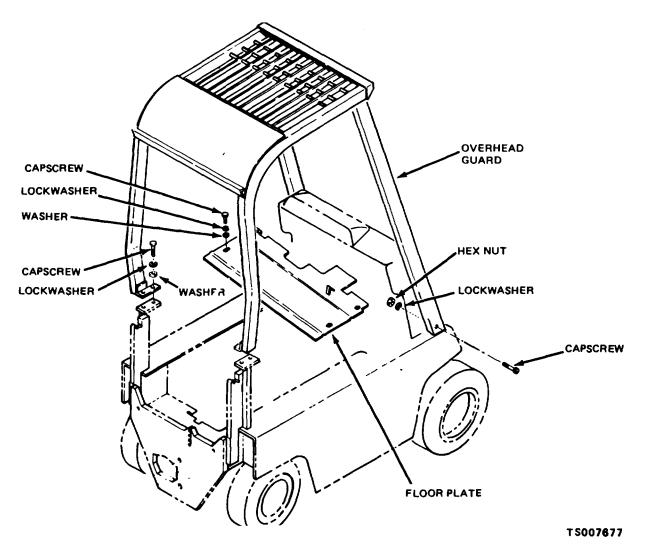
Overhead Guard and Floor Plate, Removal and Installation
